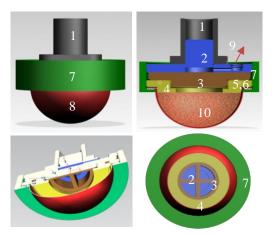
Assembled the gripper system in four views. 1) adapter (for connecting the gripper system to the robot arms), 2) vacuum channel plate, 3) filter (covered with textile filter), 4) balloon holder, 5) upper sealing ring, 6) lower sealing ring, 7) housing shell, 8) membrane, 9) air input-output, 10) powder.
